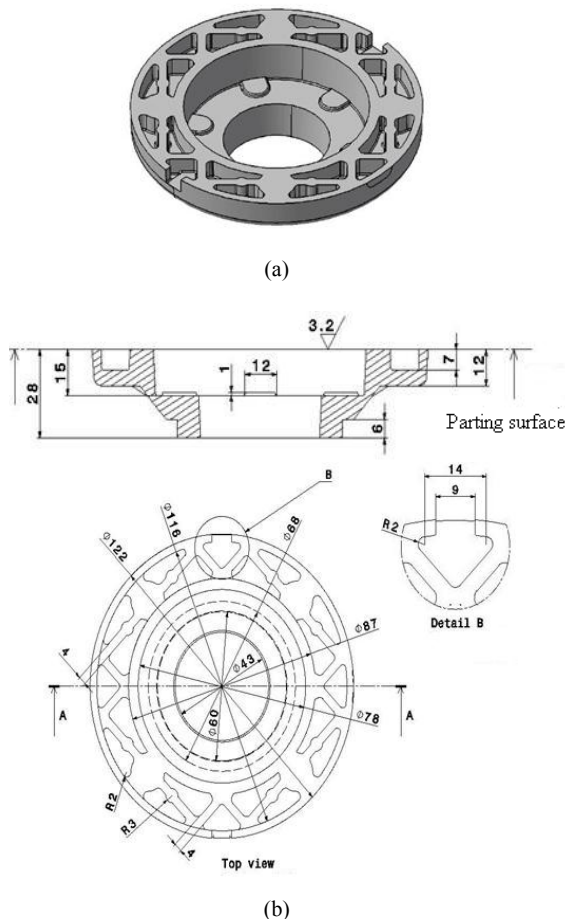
(a) Model and (b) dimensions of the helical gearbox flange (all dimensions are in mm)
